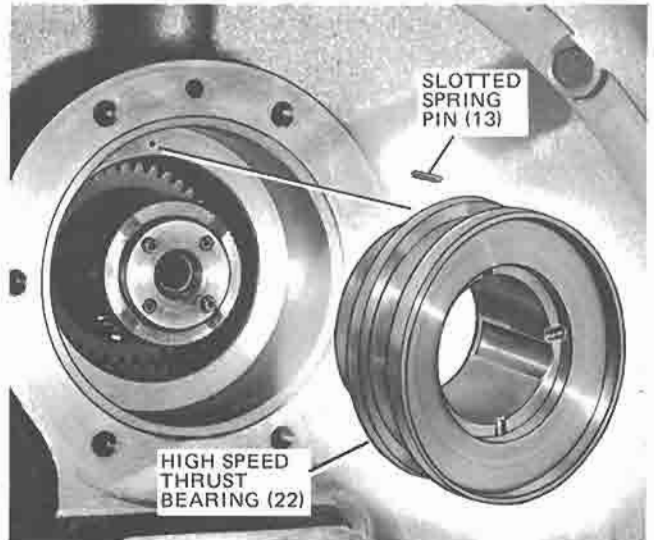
ASSEMBLING REAR HIGH SPEED THRUST BEARING
